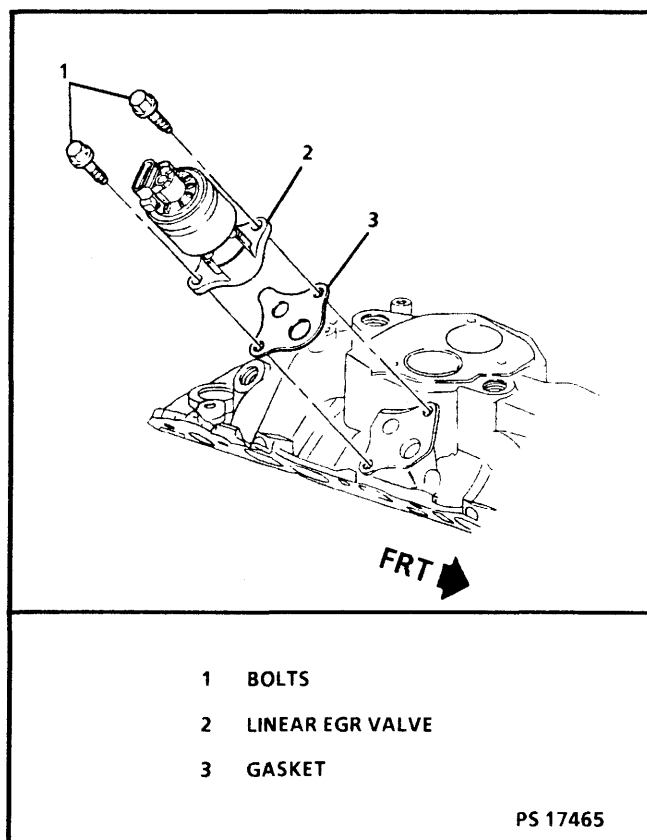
A-5 - Linear EGR Valve Removal - 7.4
